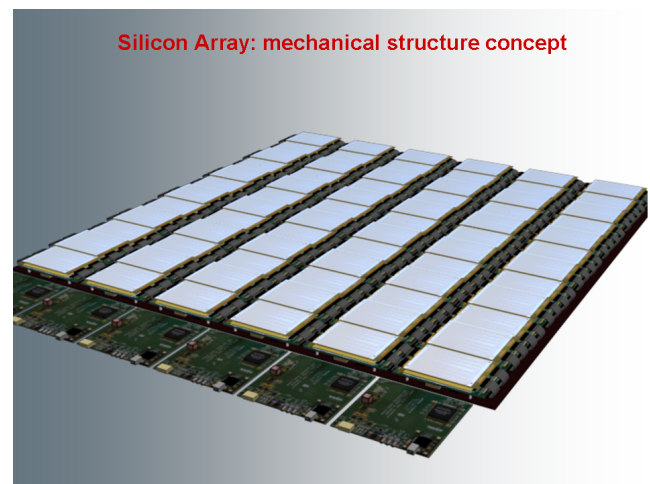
Artist's view of the integrated assembly of the lower module of the Silicon Array
